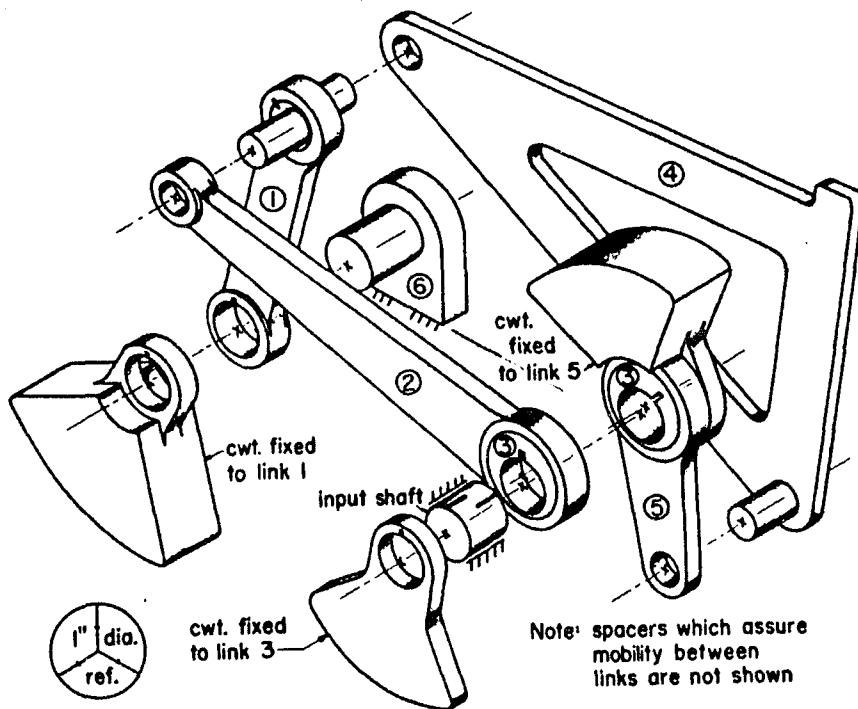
Counterweight balancing of prescribed six-bar linkage (exploded view)
